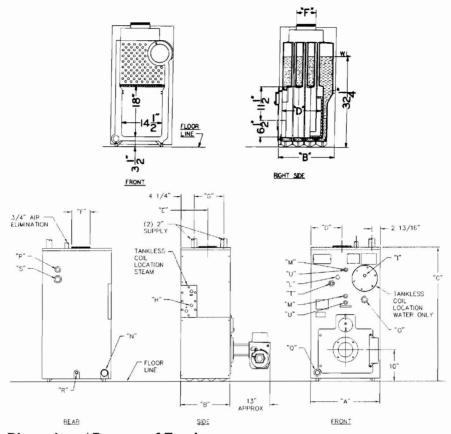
Boiler Dimensions / Purpose of Tappings
